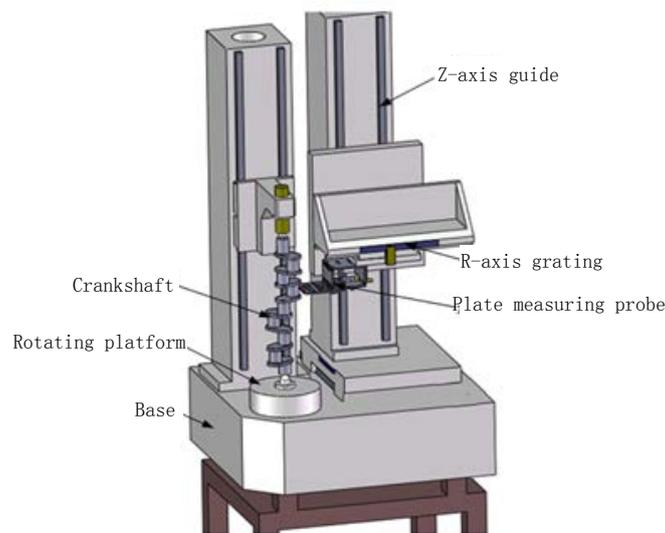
The structure diagram of crankshaft comprehensive measuring machine
